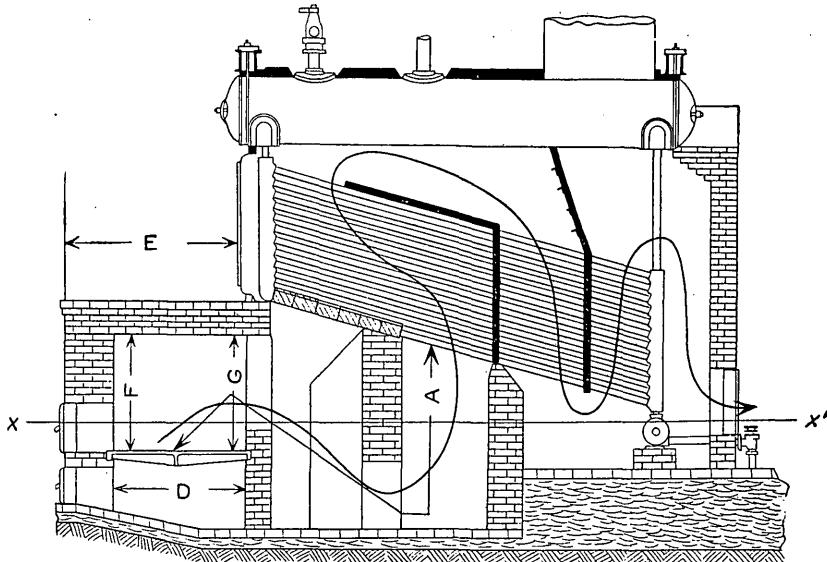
A hand-fired furnace and Babcock & Wilcox boiler, elevation. $X-X'$, Line of sectional plan, figure 30.
